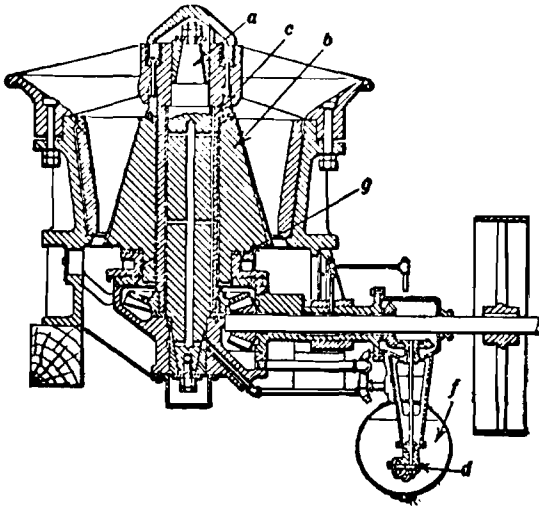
Sectional view of fixed-spindle gyratory crusher (courtesy of Barber-Greene). Legend: (a) shaft, (b) head center or crushing cone, (c) eccentric sleeve, (d) lubrication pump, (f) oil well, (g) mantle.
